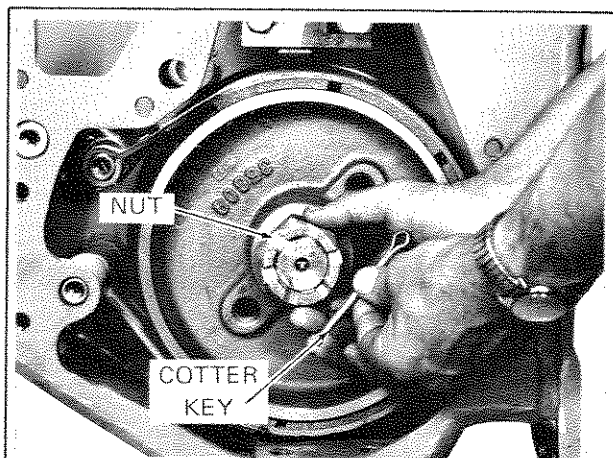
Removal And Disassembly Of PTO Shaft Assembly, Lo-Speed (Sheet 3 of 4)
